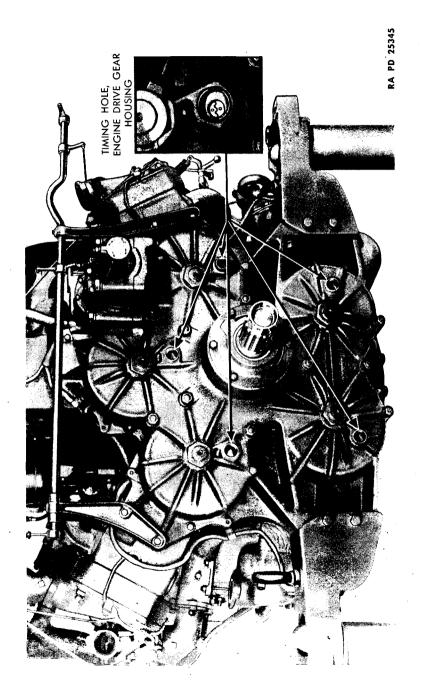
Openings In Power Unit For Checking Indexing Of Engine Drive Gears And Engine Drive Clutch Sleeve
